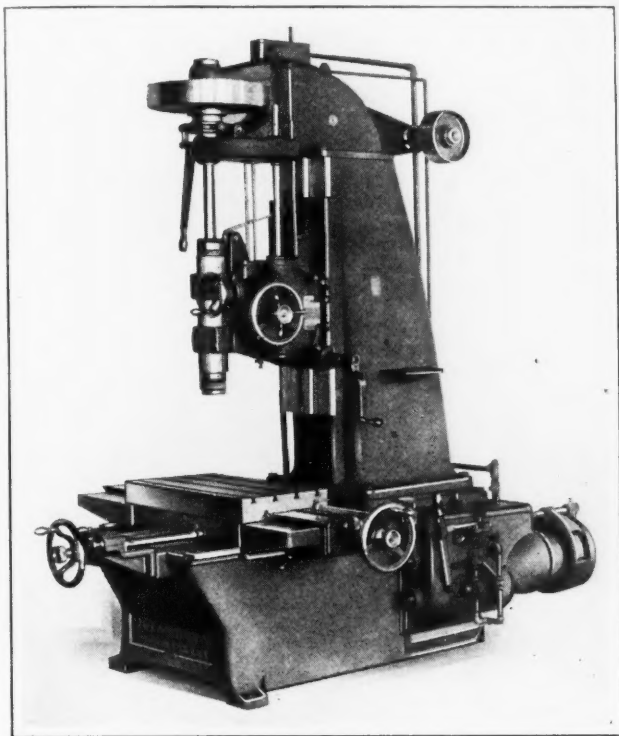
Pratt & Whitney Improved Jig Boring Machine
